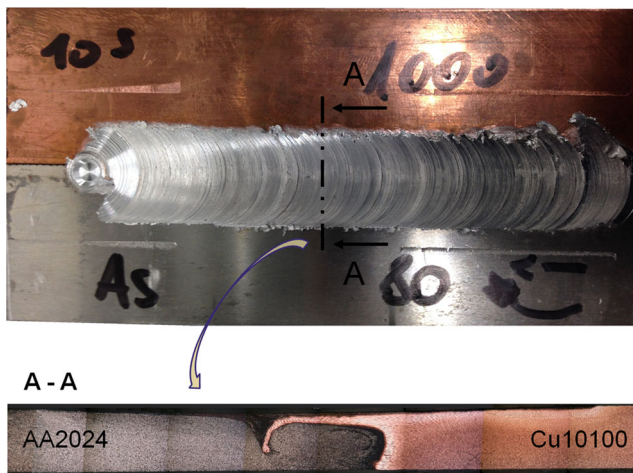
Surface morphology of the joint (*top*) and cross-section macrograph of the joint (*bottom*)
